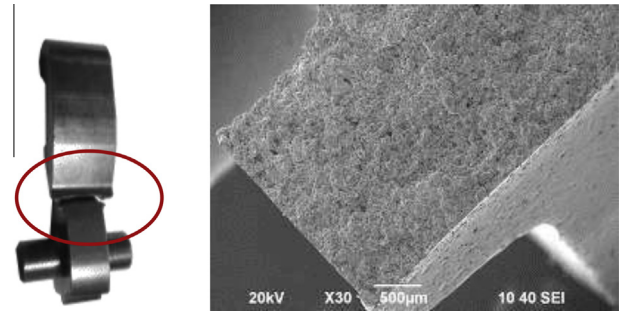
Fracture of the part composed of Alloy 2 after operational testing.
